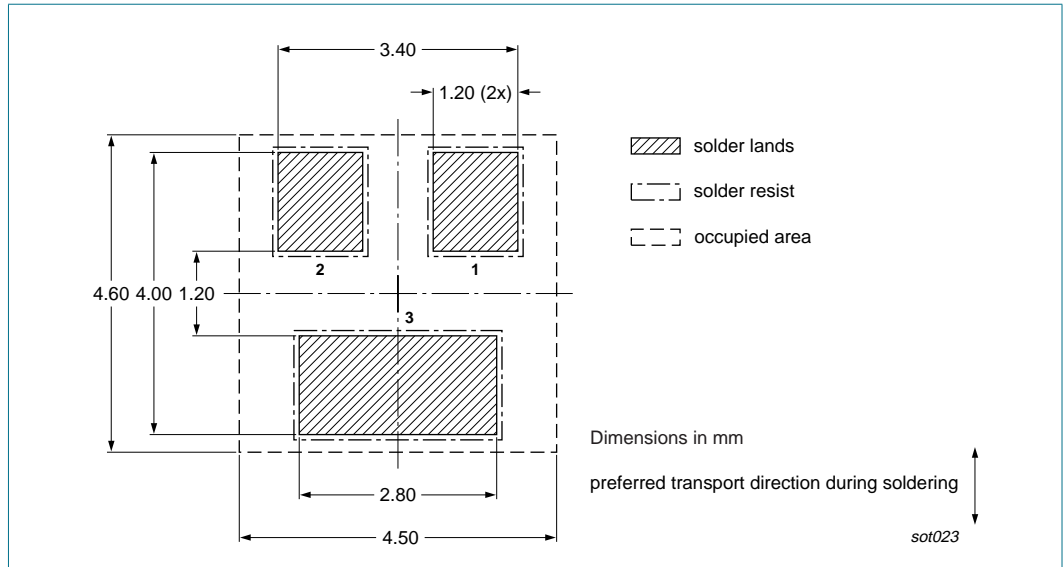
Wave soldering footprint BAV70 (SOT23/TO-236AB)
